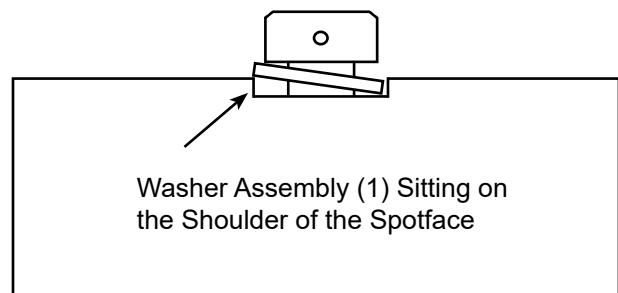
Non-Acceptable Set Screw and Washer Assembly Alignment
